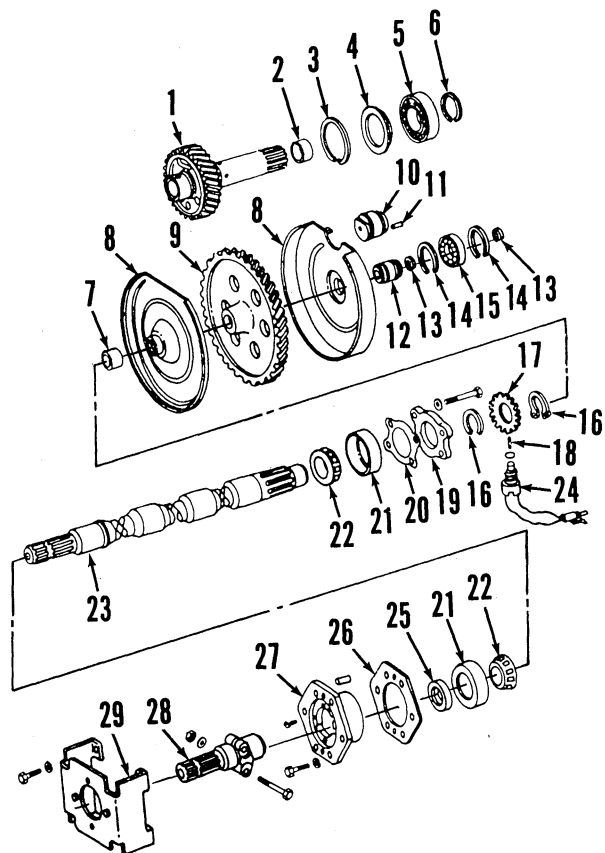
Exploded view of single-speed pto power train components used on Model 4650 with Quad-Range transmission.
